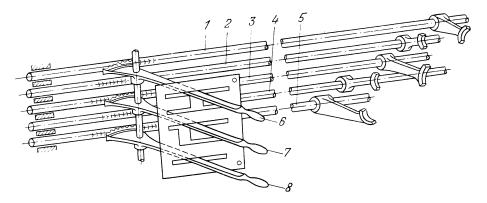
The use of rack transmissions in the control mechanism of a speed gearbox
